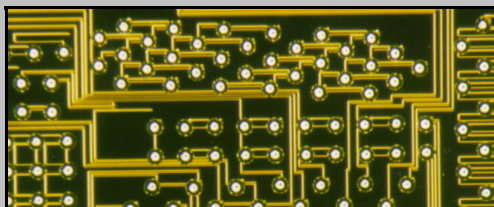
IC test vehicle with 1440 pads, bumped with 63/37 using Solder Jet Technology. Ball size is 70 μ m.
